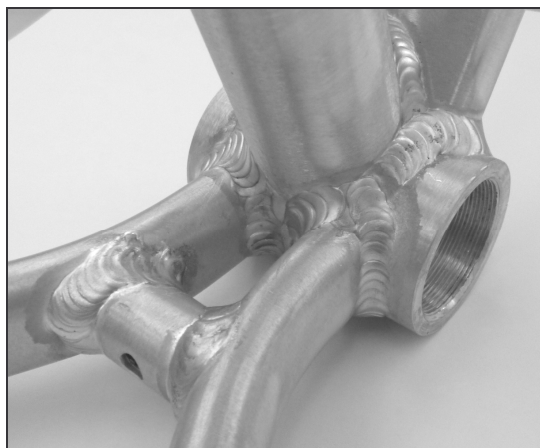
Typical aluminium welded frame – Bottom bracket area
